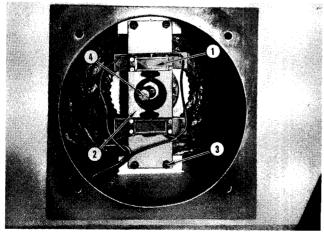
STEERING LIMIT SWITCHES 1. Limit Switch 2. Support Plate 3. Capscrews 4. Cam
